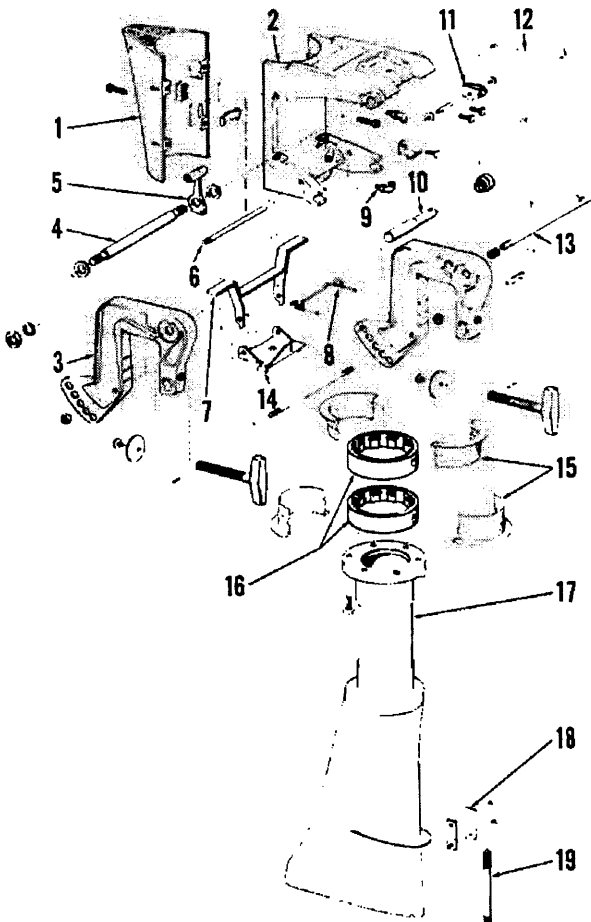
Exploded view of motor leg and stern bracket assembly.
